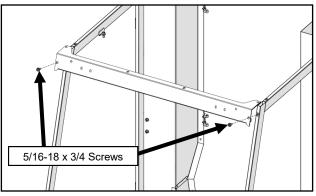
(Windshield Support to Side Frame Fasteners)
